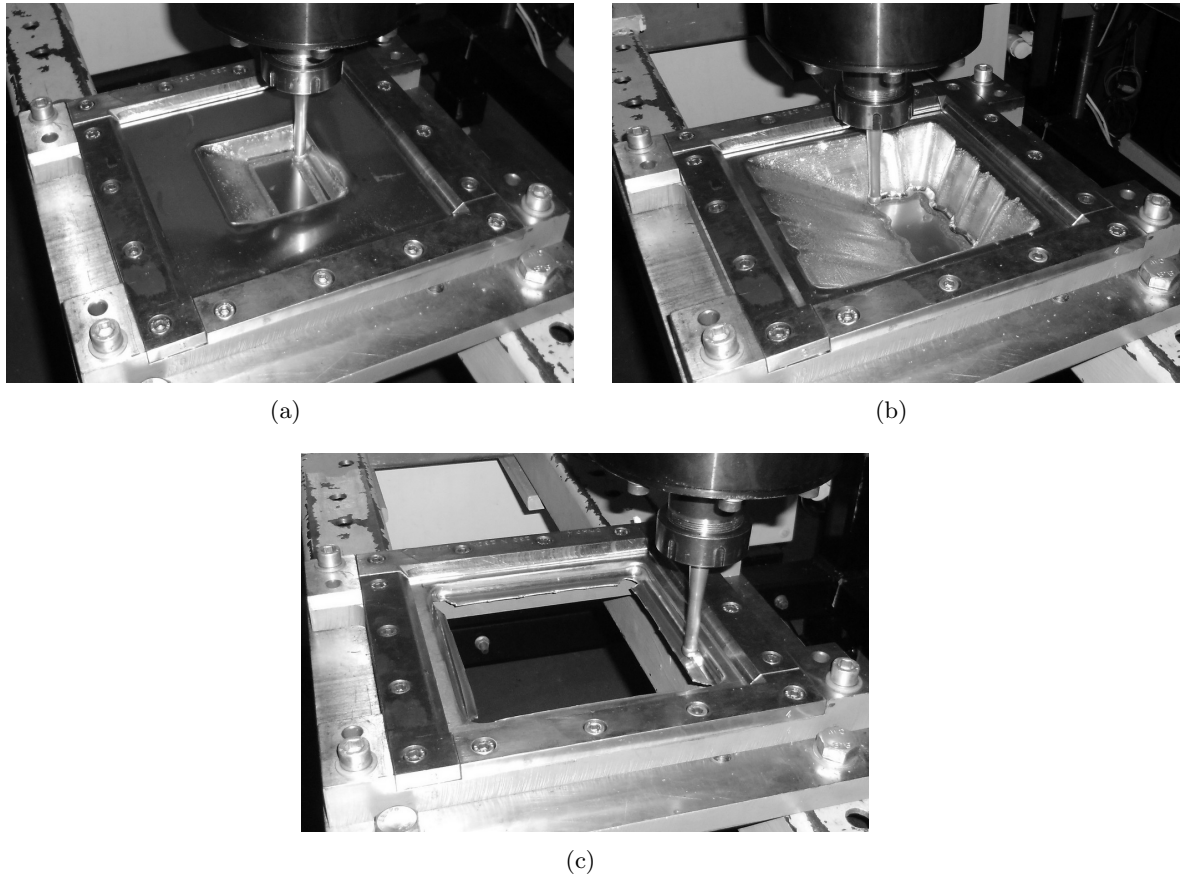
SPIF operation forming sheet metal cork compression mould: (a) core side, (b) cavity side, (c) frame box flanged part
